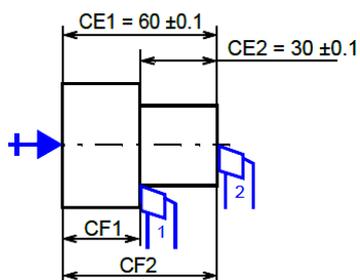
Design dimensions specified by the designer, CEi , and manufacturing dimensions used by the setter, CFi .
